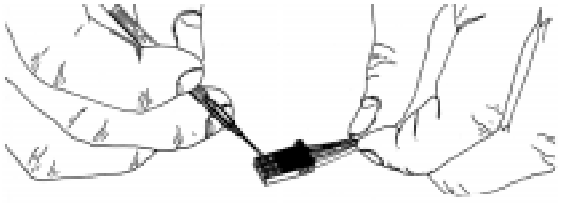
Using the screwdriver, carefully bend each of the metal locking tabs to the angle shown.
